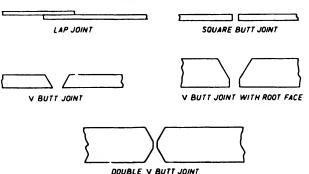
Typical joint designs for bronze welding (sheet and plate)
